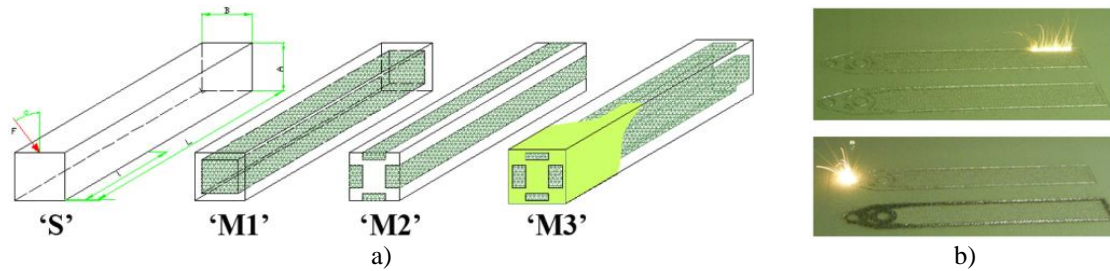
Designs of developed toolholders (a) and procedure of selective laser sintering powder (b).
